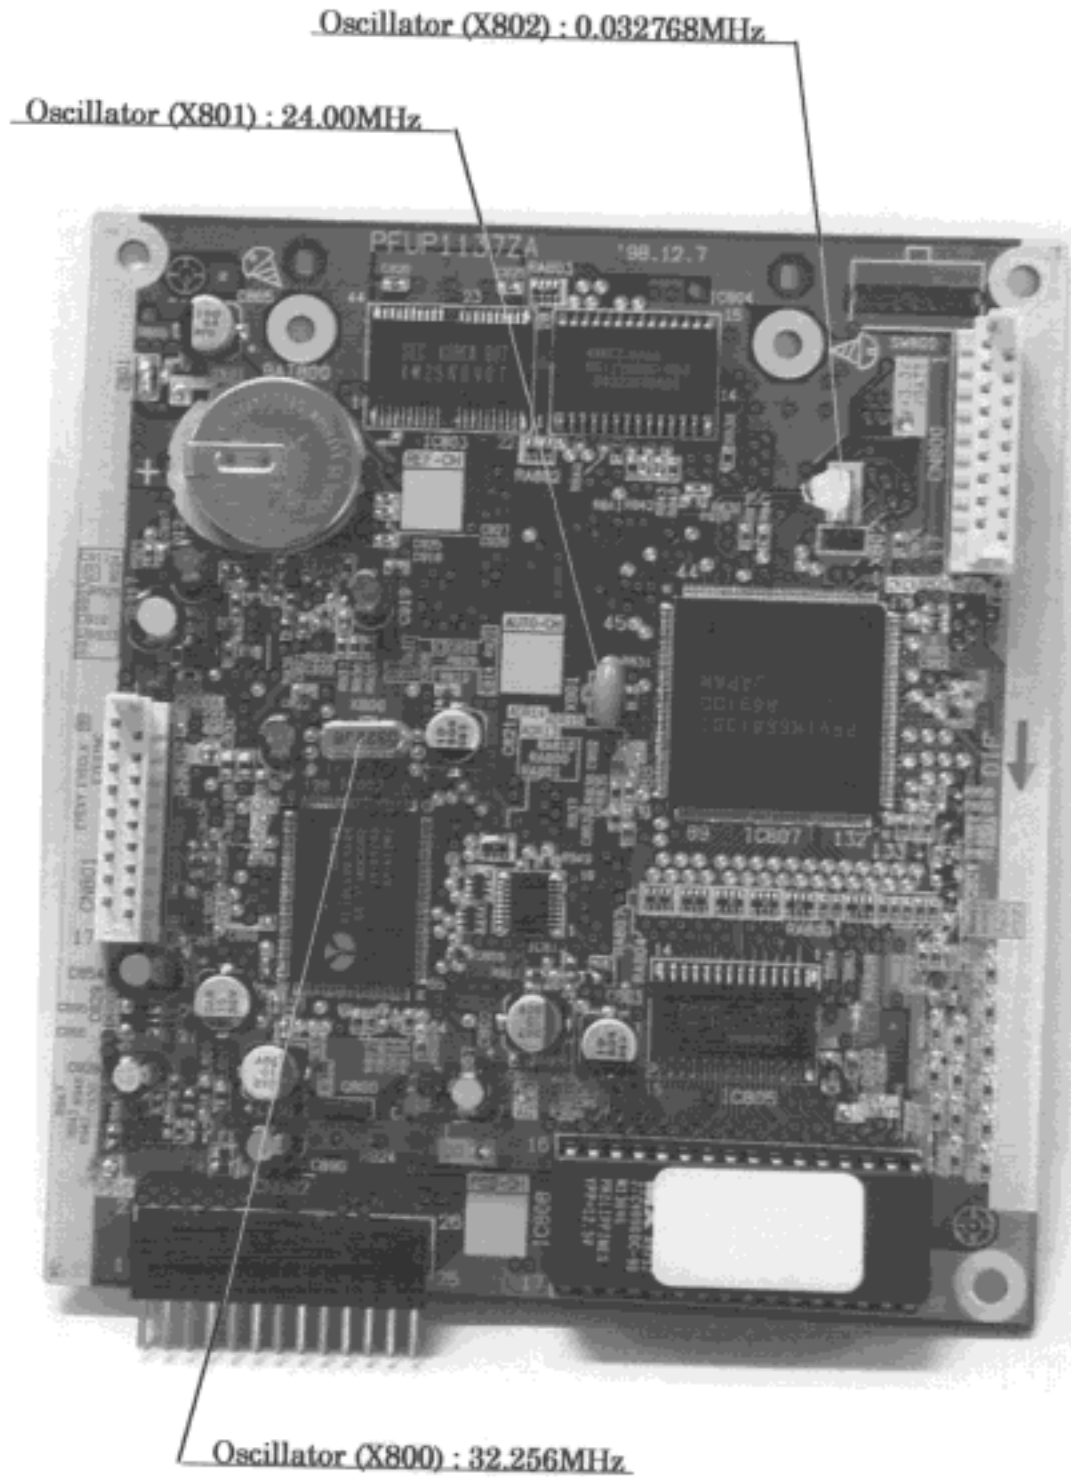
DIGITAL BOARD SOLDERING SIDE
